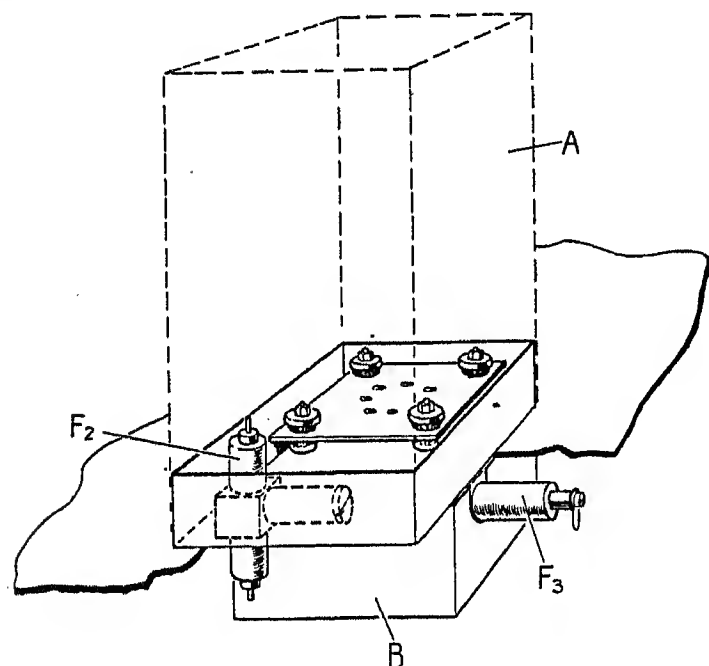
Sketch showing typical layout of screened valveholder assembly for low-level stages.
